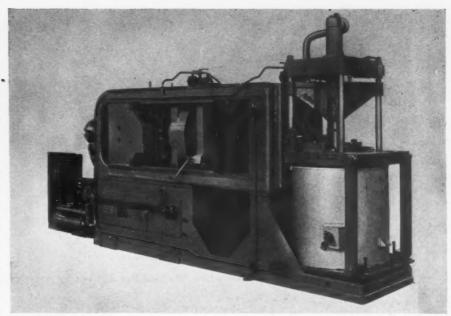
Lester-Phoenix Improved Die-casting Machine Equipped for the Production of Zinc Castings
